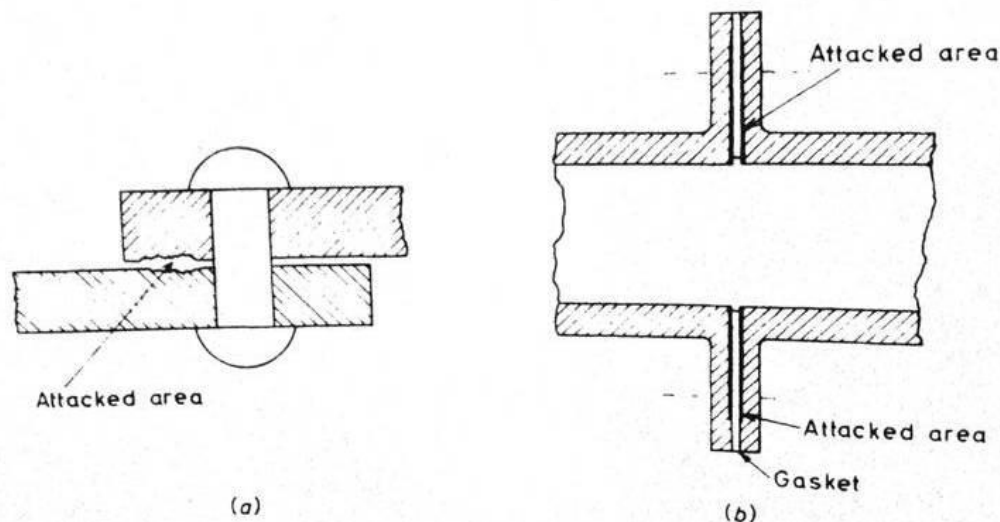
Crevice corrosion: (a) crevice resulting from the joining of the two plates of steel; (b) crevice due to a gasket between two flanged pipes [11].
